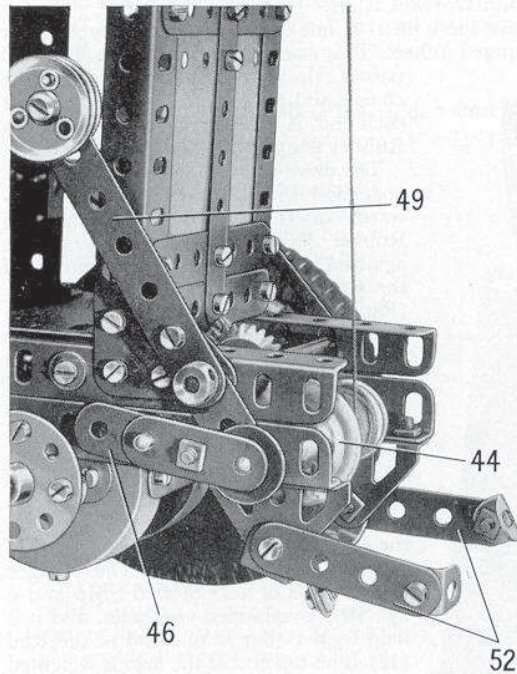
The balance weight and lever fitted to one end of the winding drum shaft
